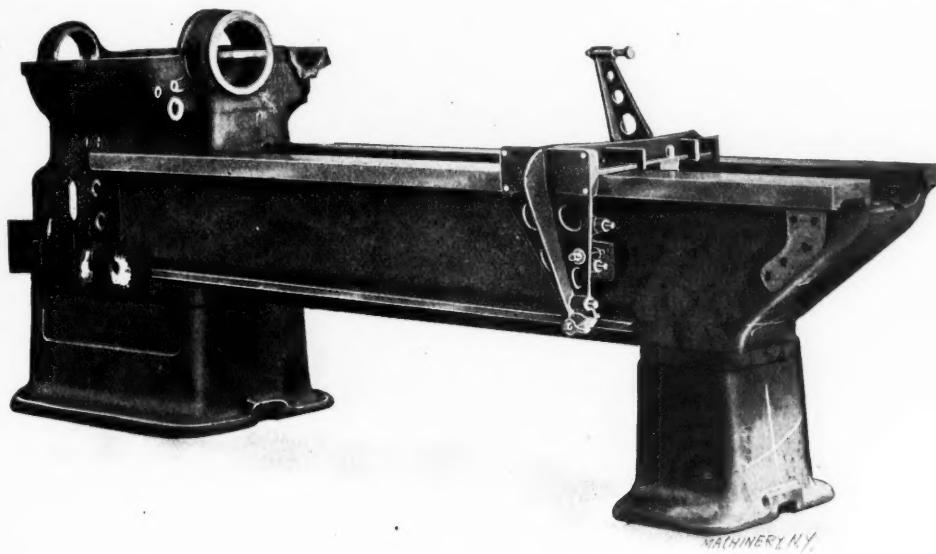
A One-piece Turret Lathe Head-stock and Bed, with the Gage by which the Planing is Tested; the Center in the Vertical Arm must coincide with the Center Line of the Spindle.
